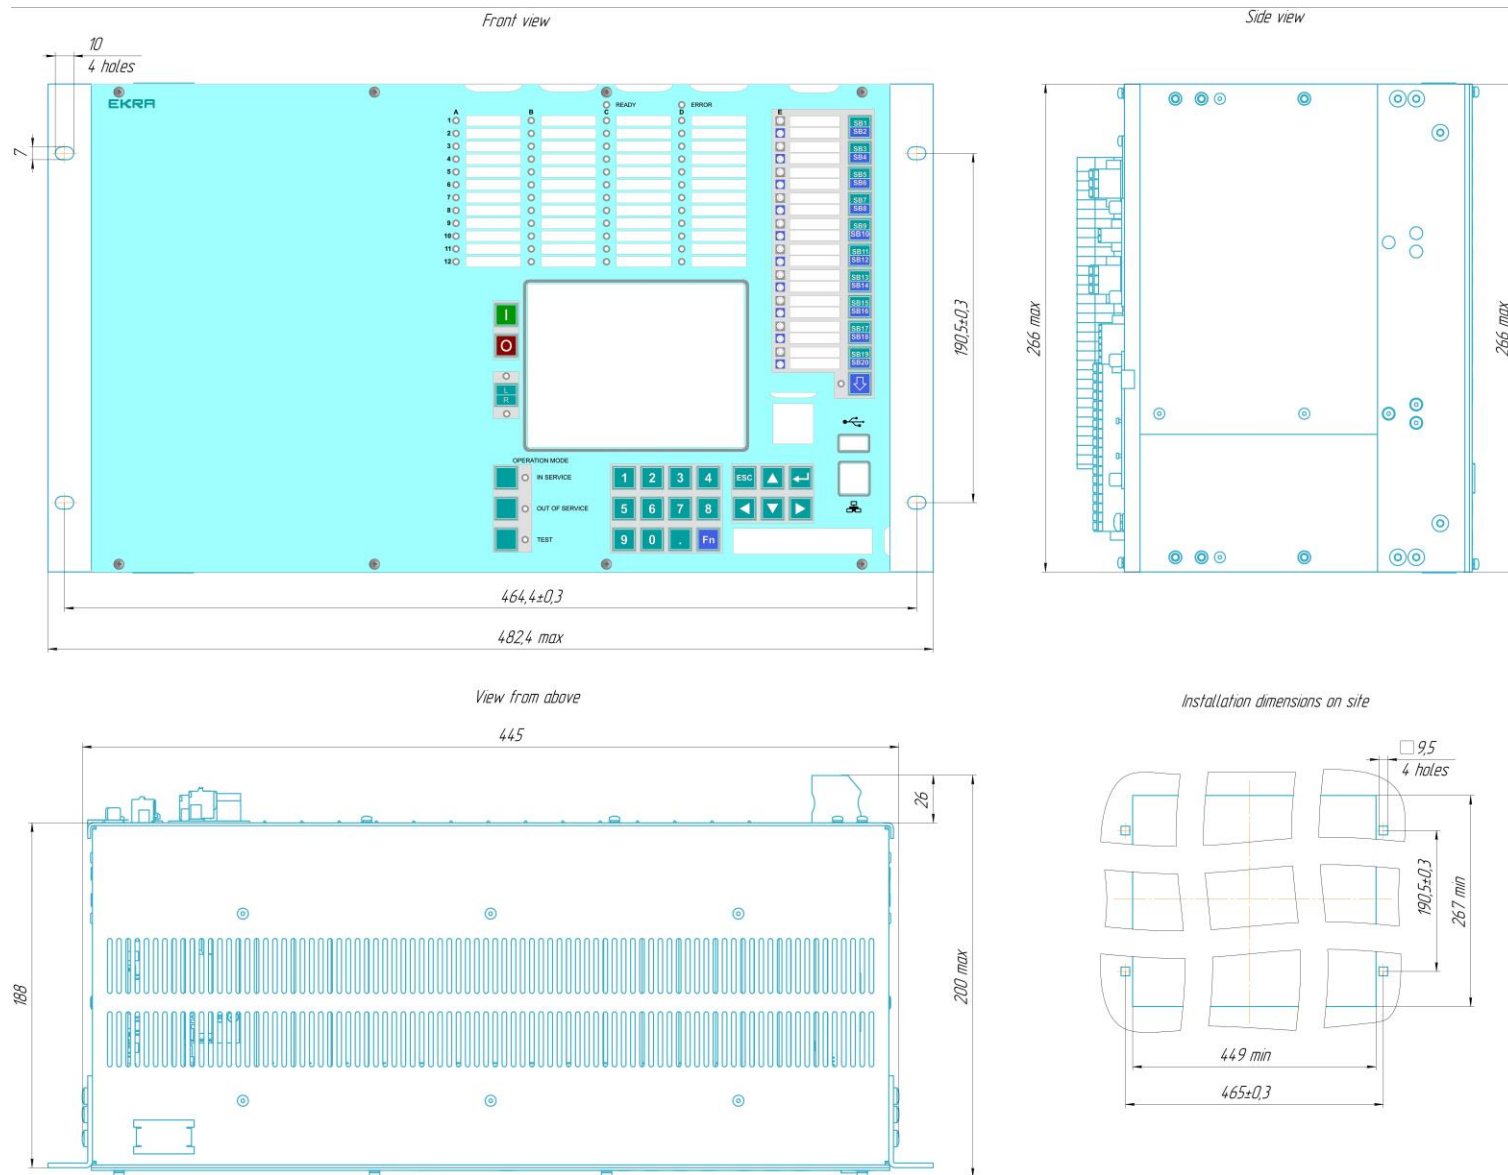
General view, overall, installation dimensions of the ED2 devices of 19" design
